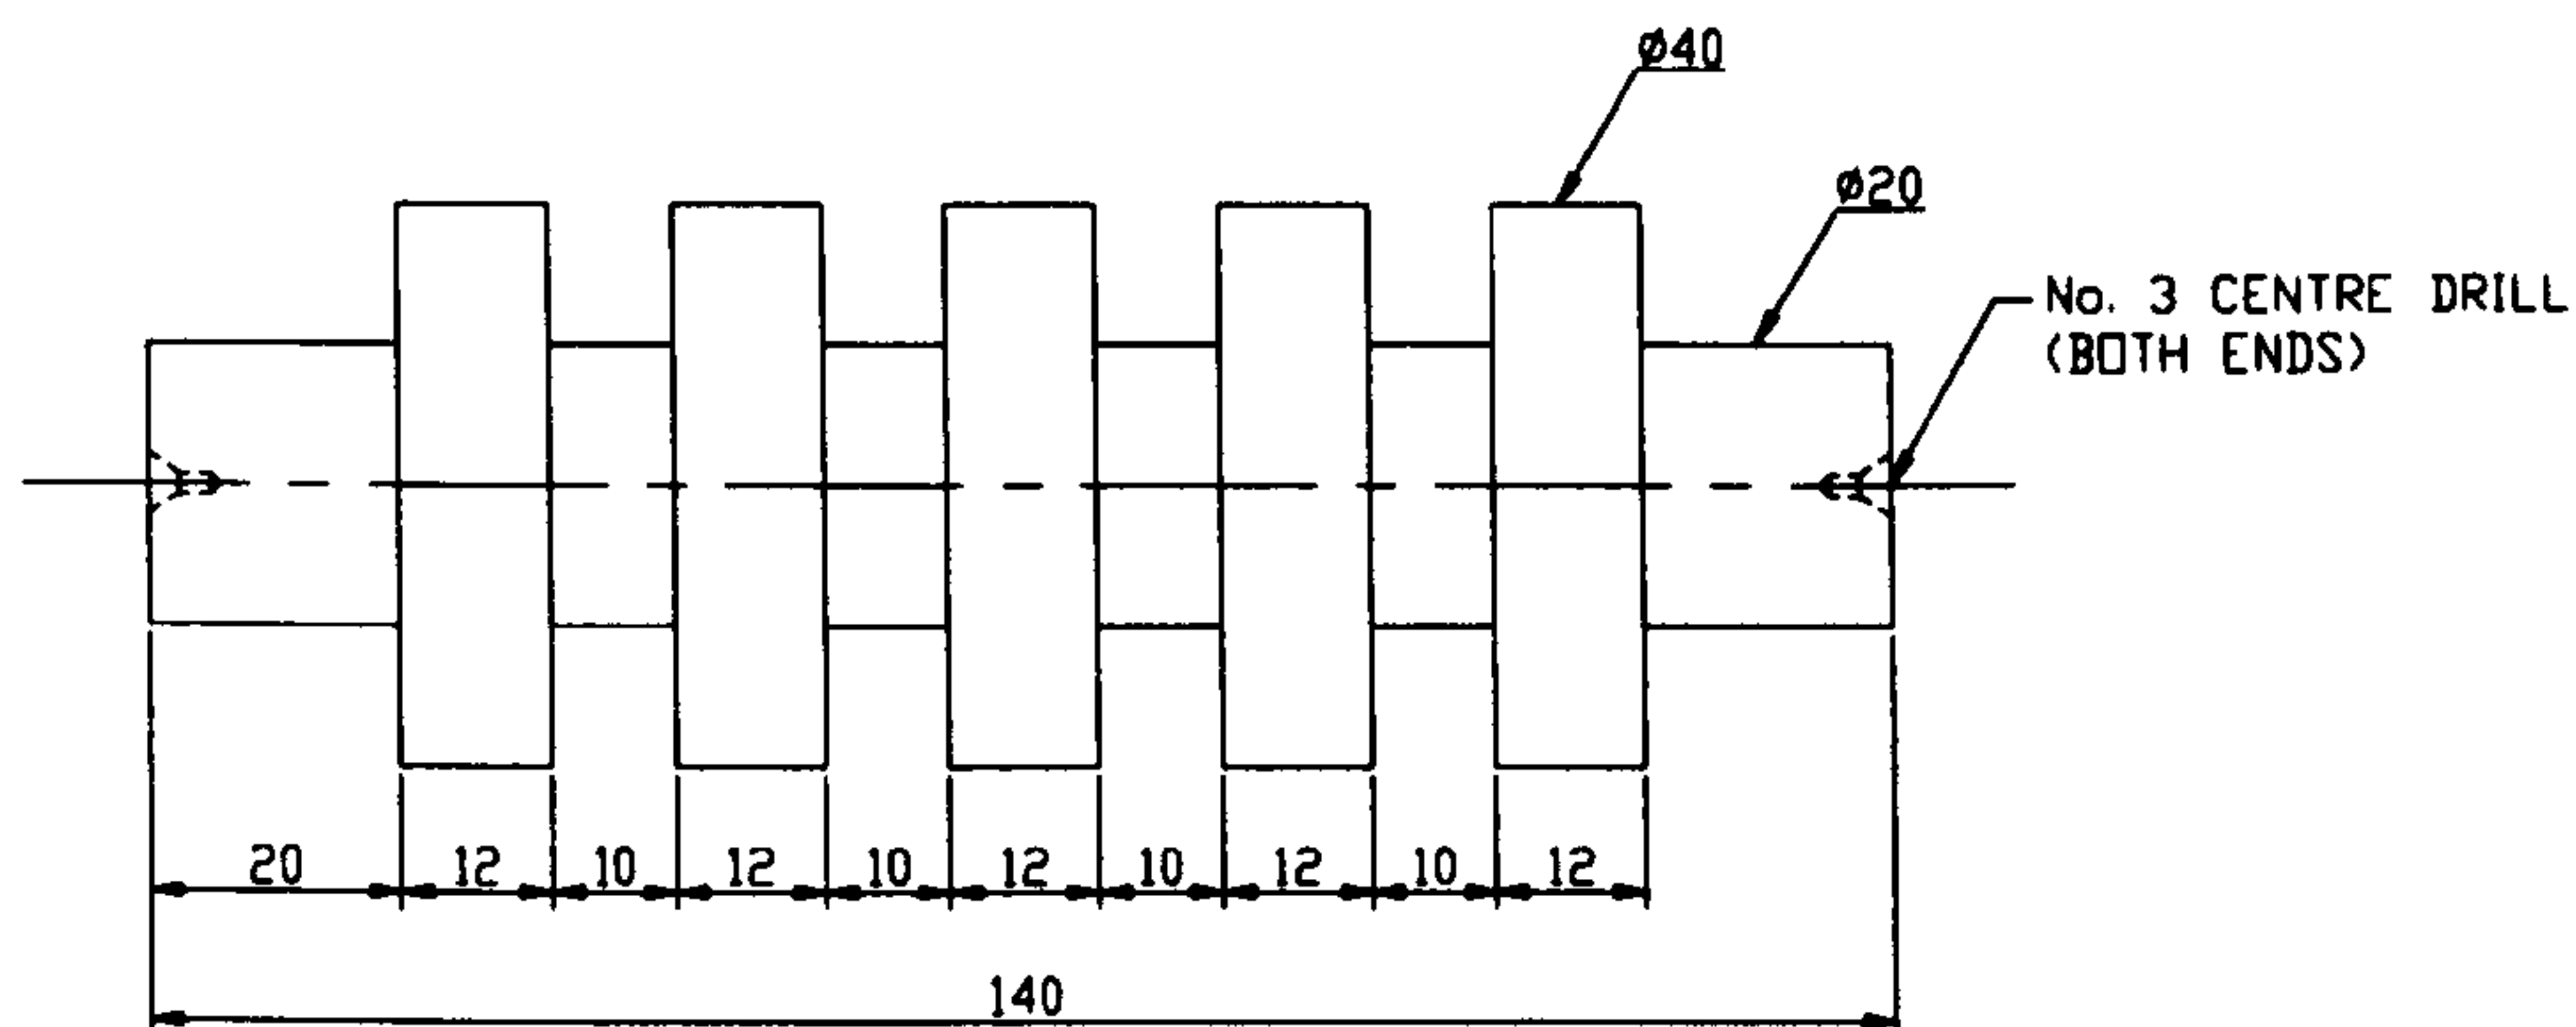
AISI 52100 workpiece, 62 HRC. All sizes are shown in mm.
